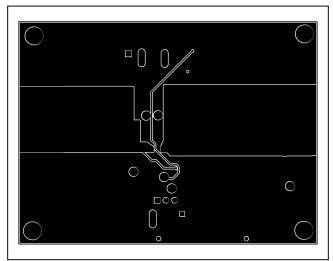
MAX15090 EV Kit PCB Layout— Layer 2 (PWR/GND)
